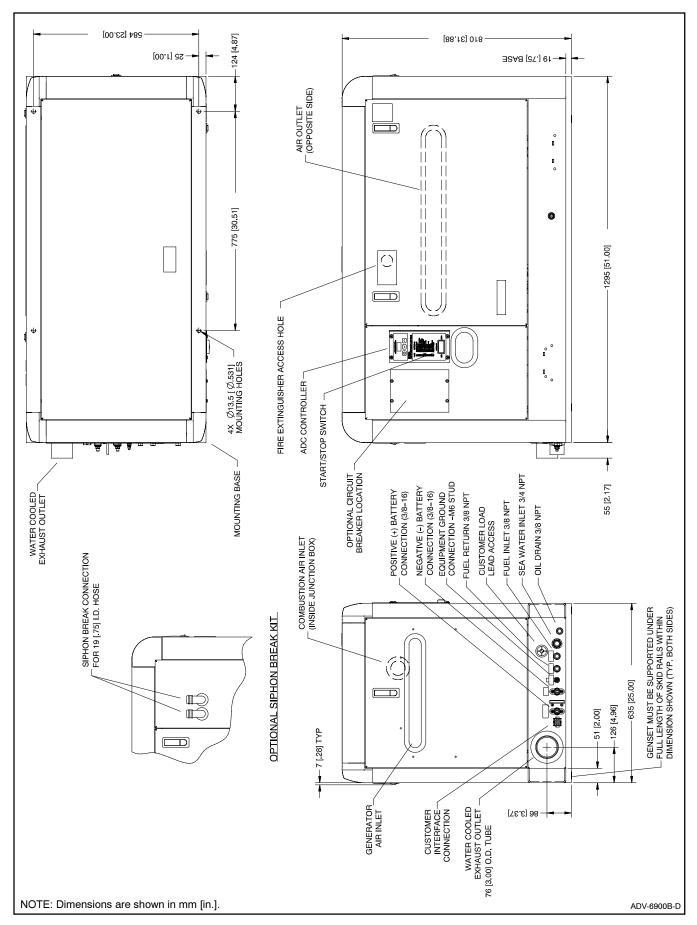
Dimension Drawing, 28/32EOZD and 23/27EFOZD with Sound Shield
